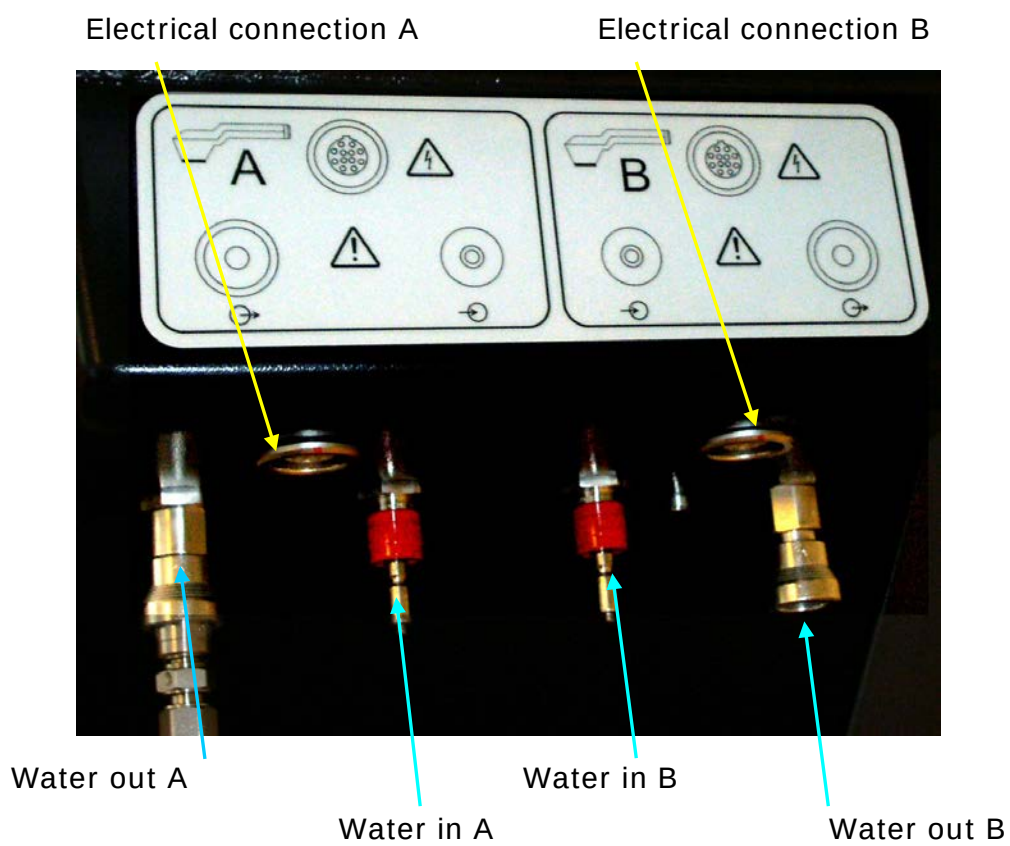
Position of electrical and water connections (SPT⁺ and I2PL⁺)
